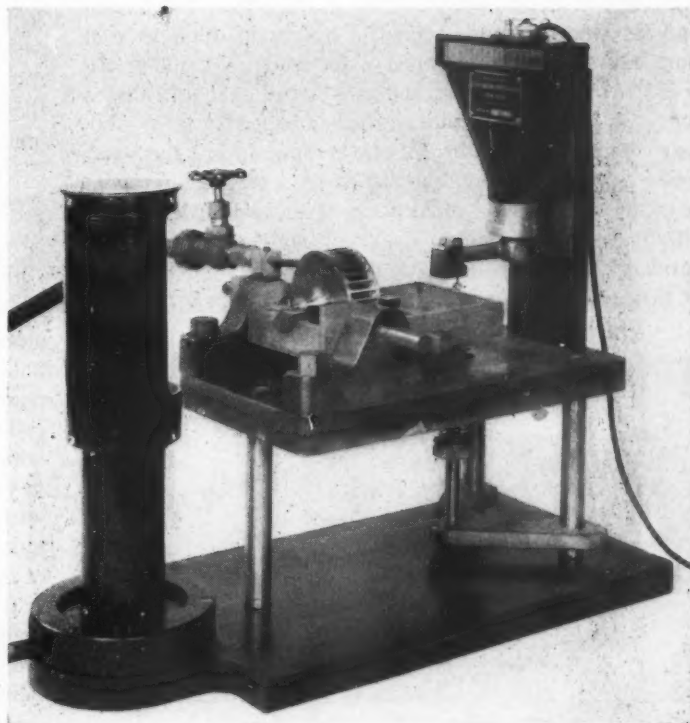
View of simple dynamic balancing apparatus shows rotor in position for balancing. Adjustable spring permits centering the amplitude-indicating light beam on the scale
